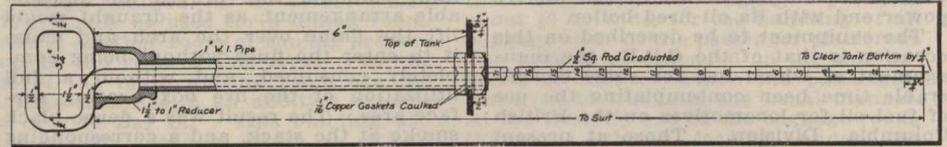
Gauge for Reading the Depth of Oil in Tank.
